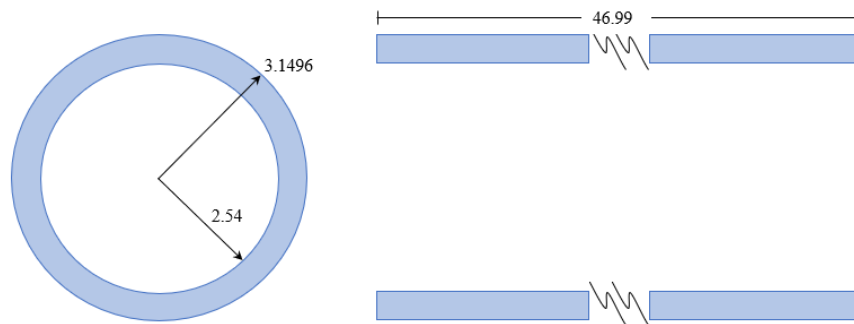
Description of the Aluminum Alignment Tube Dimensions for the Detailed Model. Dimensions are in centimeters.
